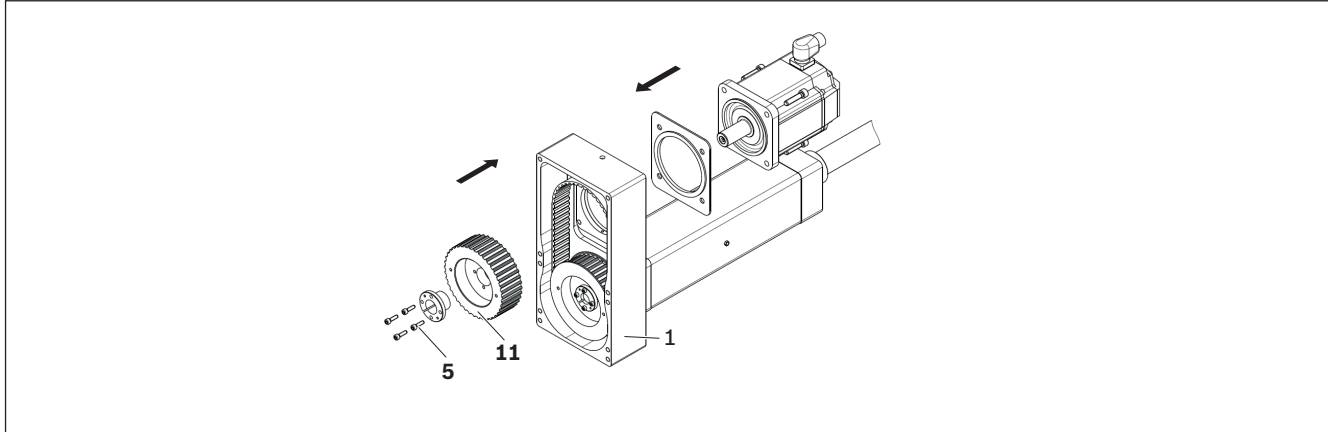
Mounting the motor and motor-side belt pulley, $i = 1$
